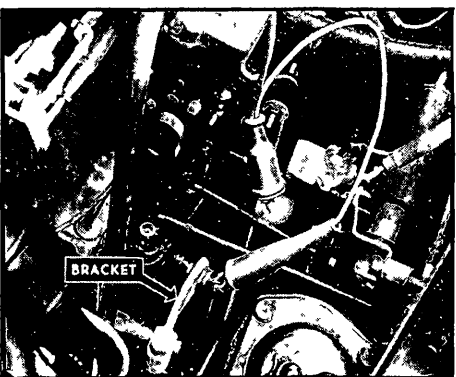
Adjusting direct speed switch, using a test lamp. 1946-50 Electromatic Clutch
